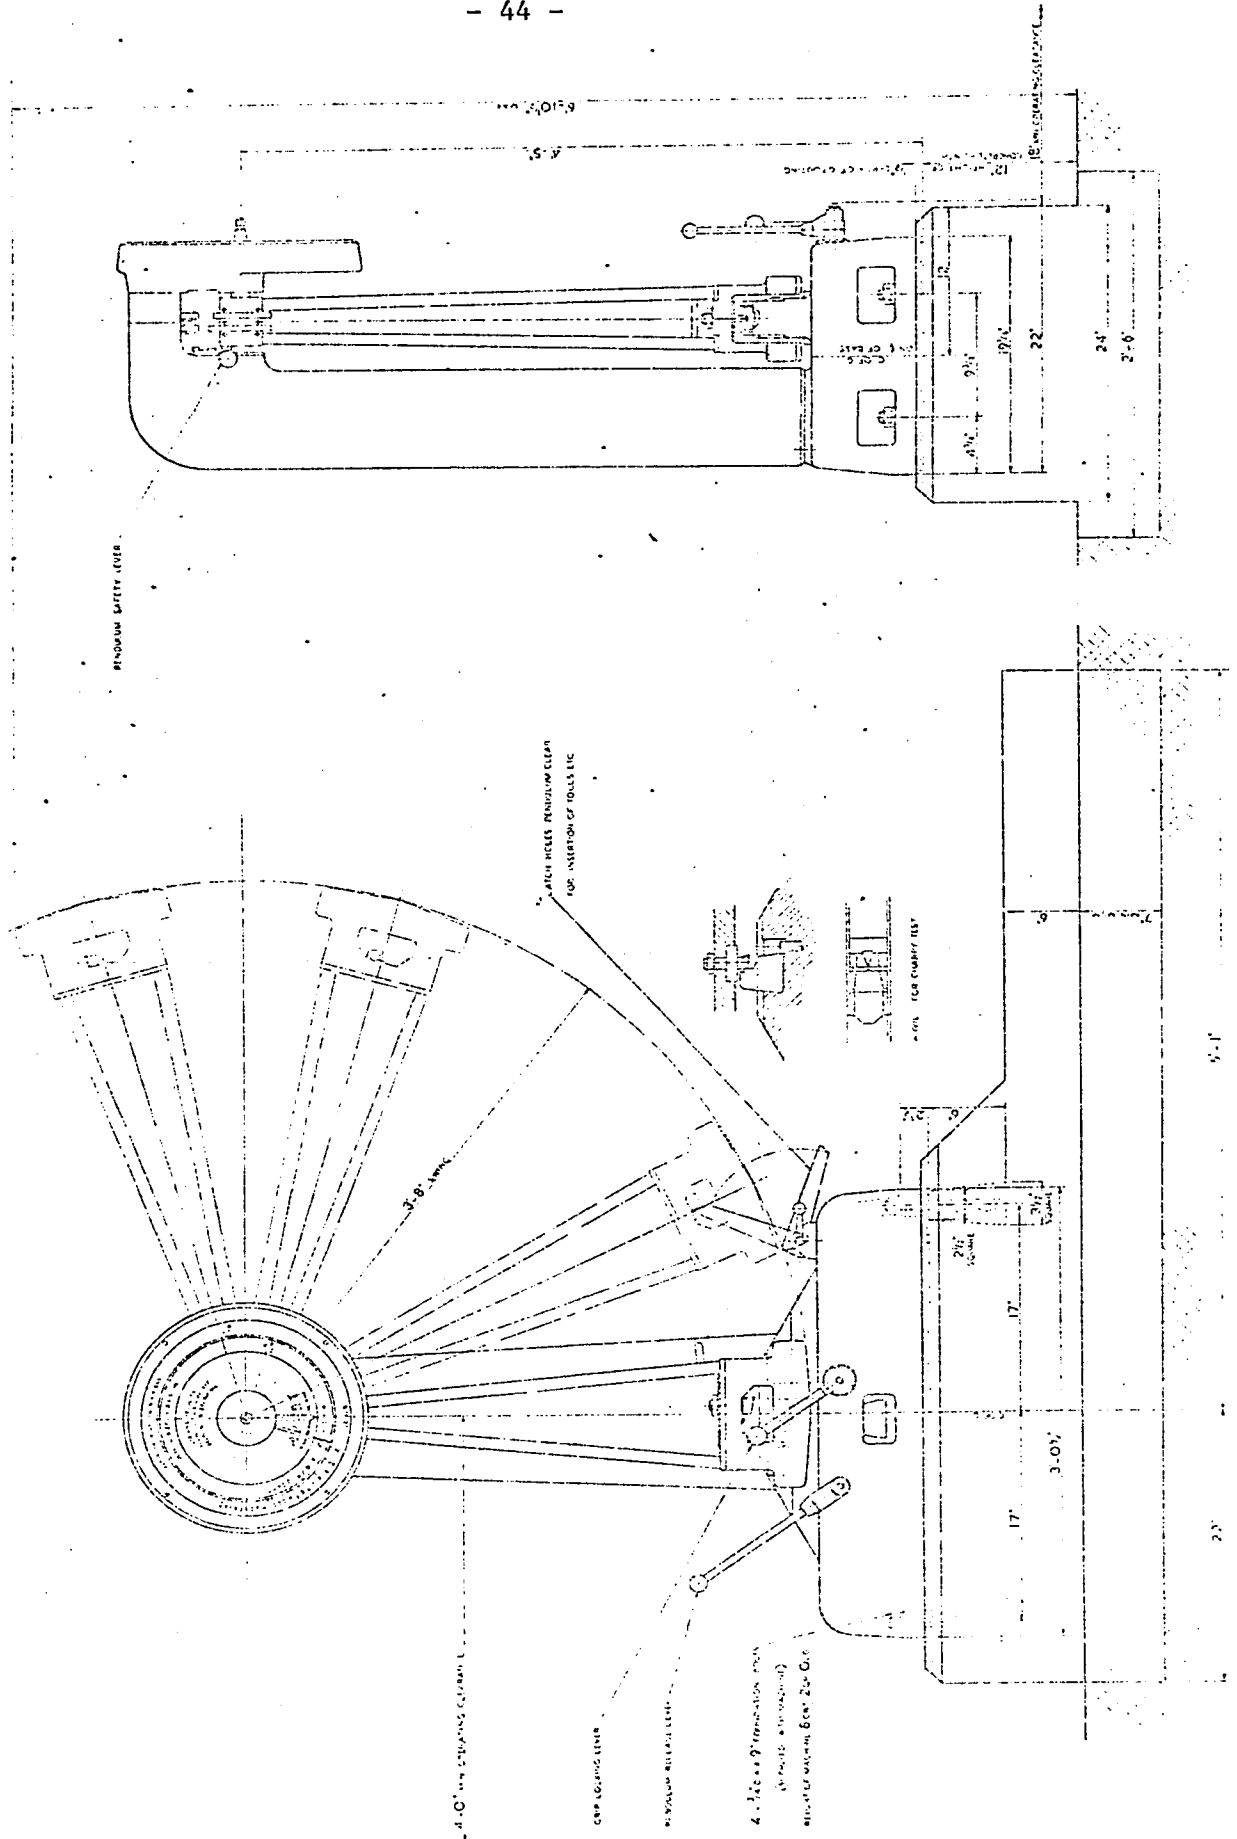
CHARPY IMPACT TEST MACHINE
